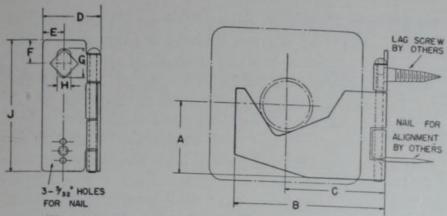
Dimensions for Bracket shown in Fig. 11.
